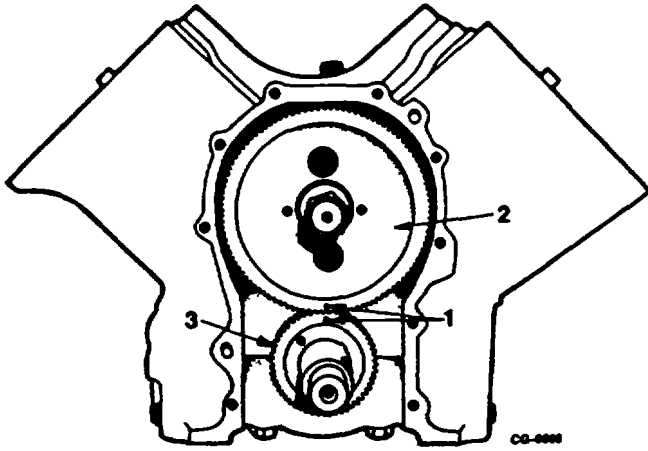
Aligning Timing Marks on Camshaft and Crankshaft Gears
